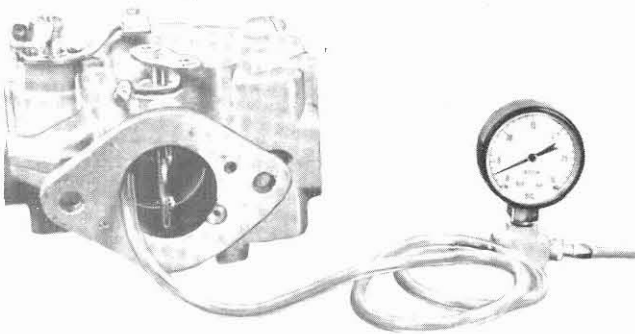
Vacuum Gage Connected to Pump-Discharge Nozzle
